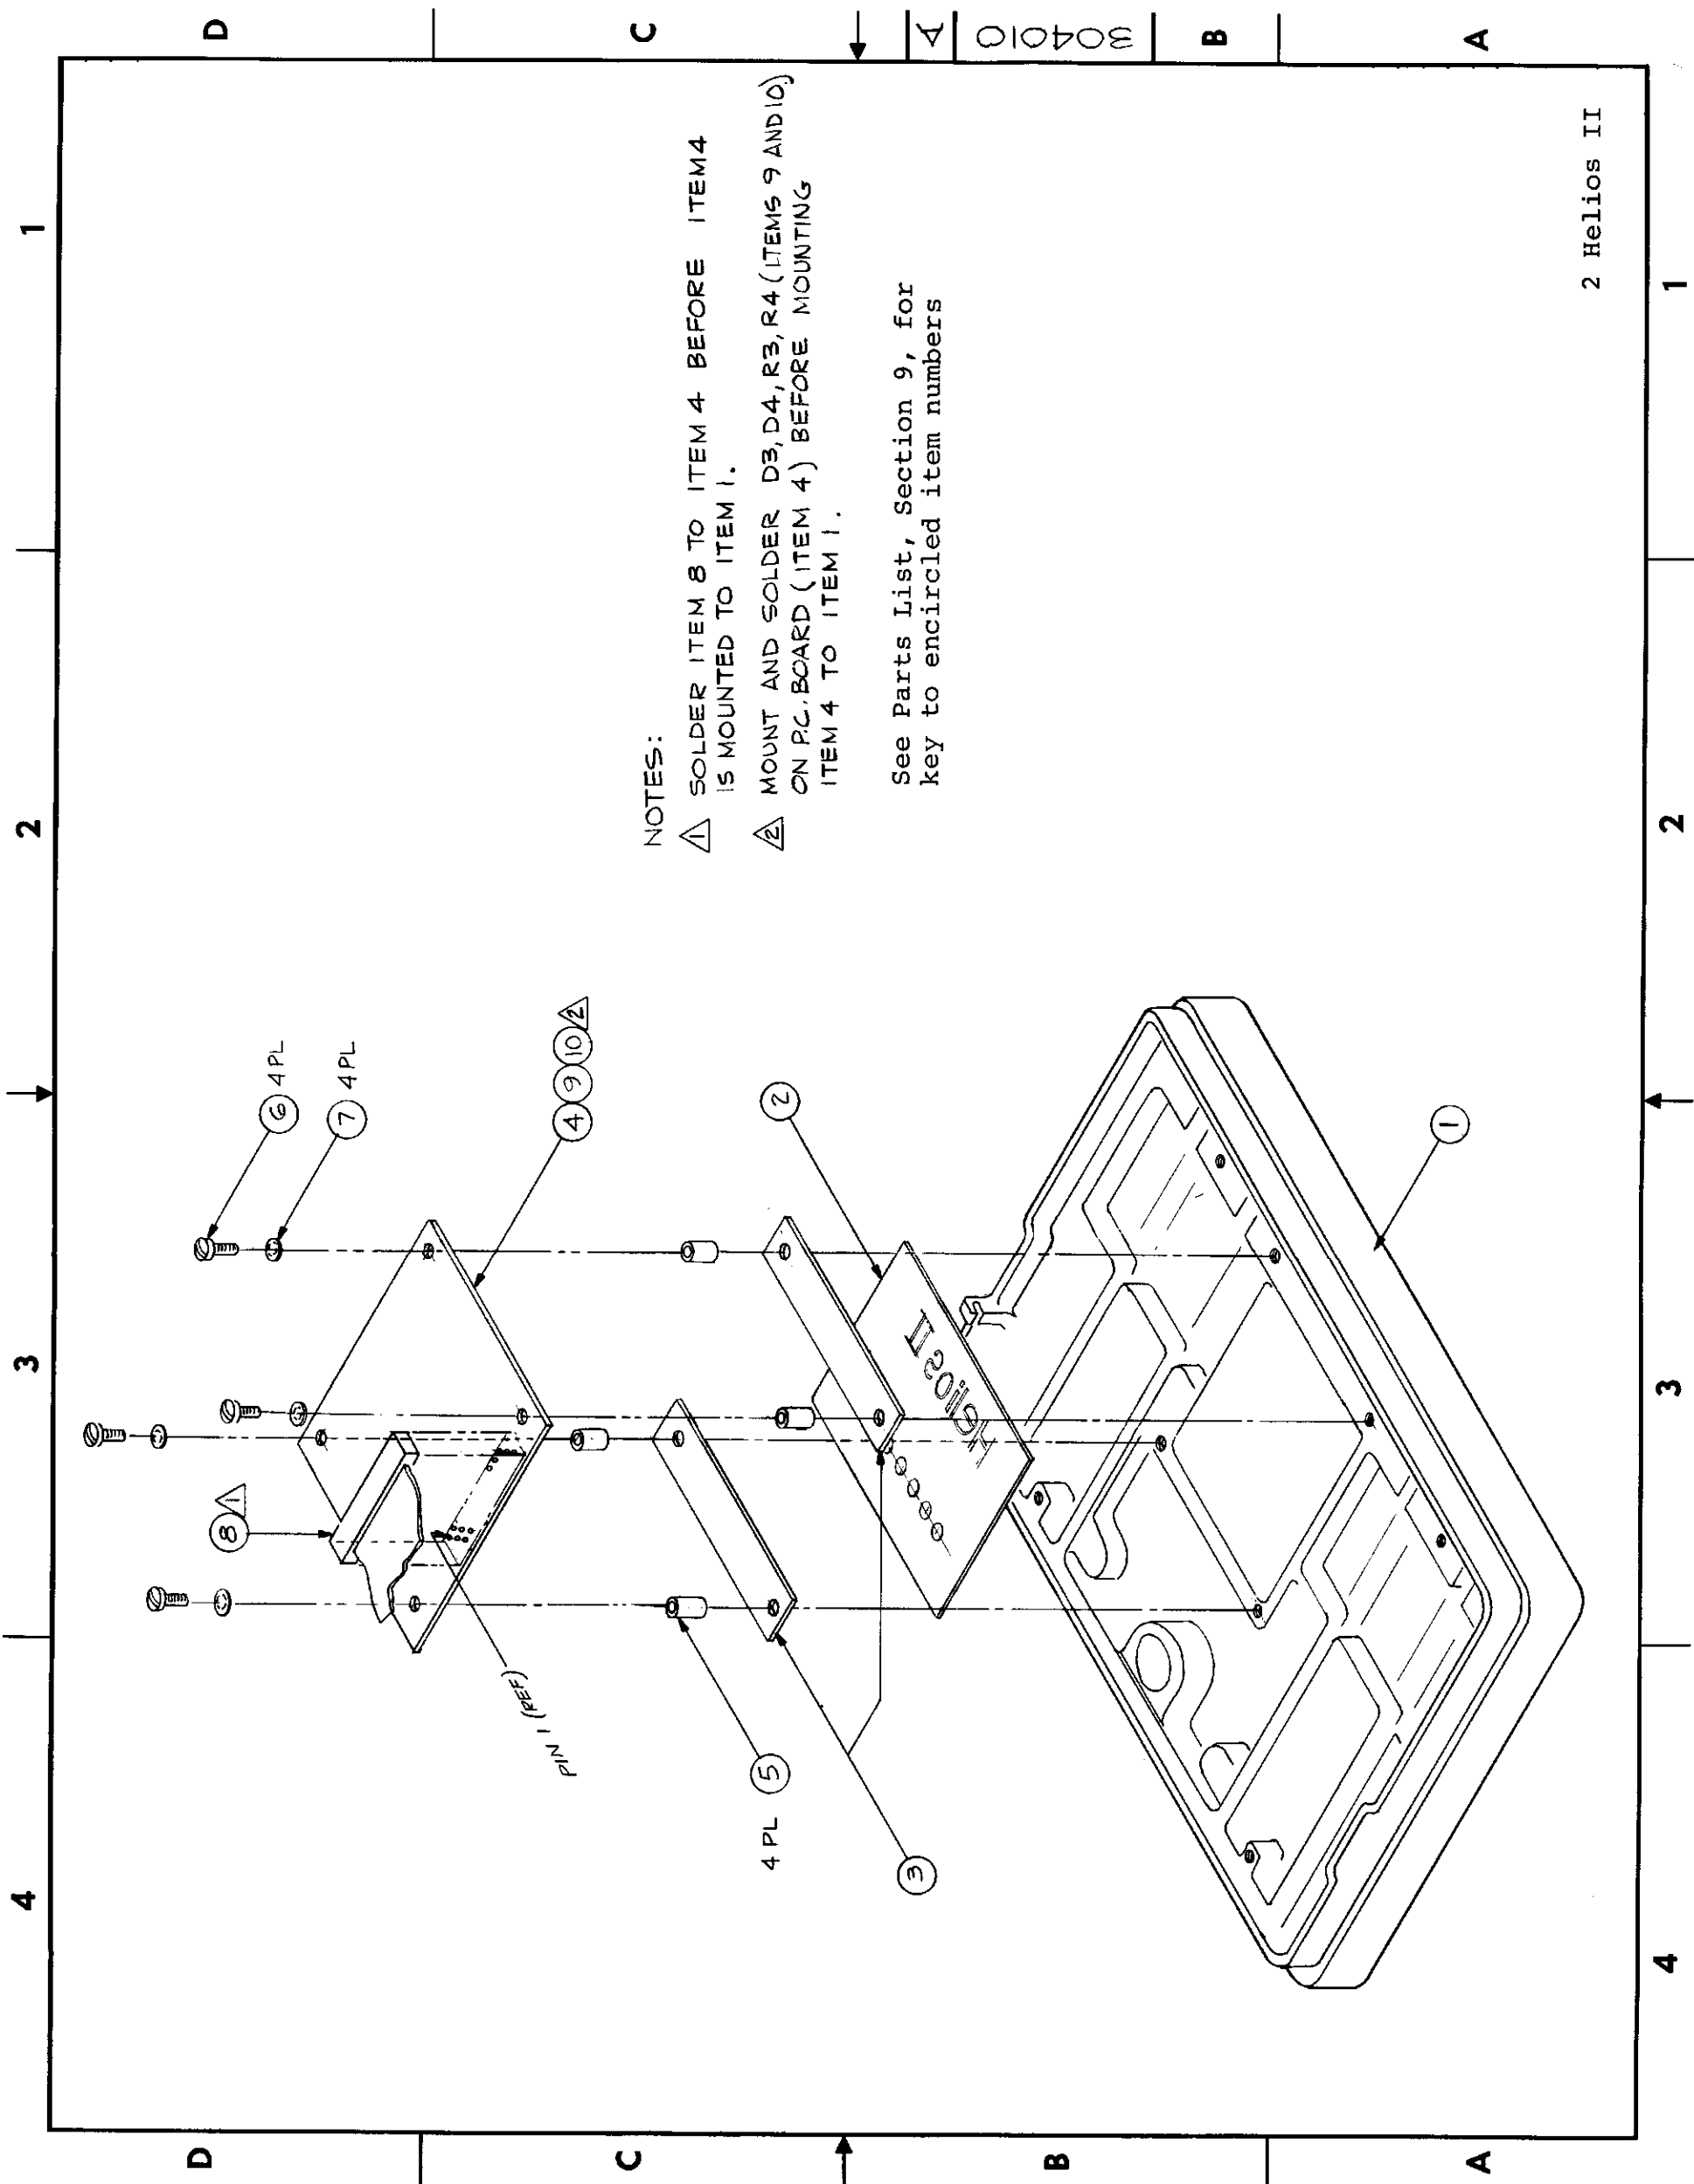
Cabinet Assembly, Model 4, Exploded
